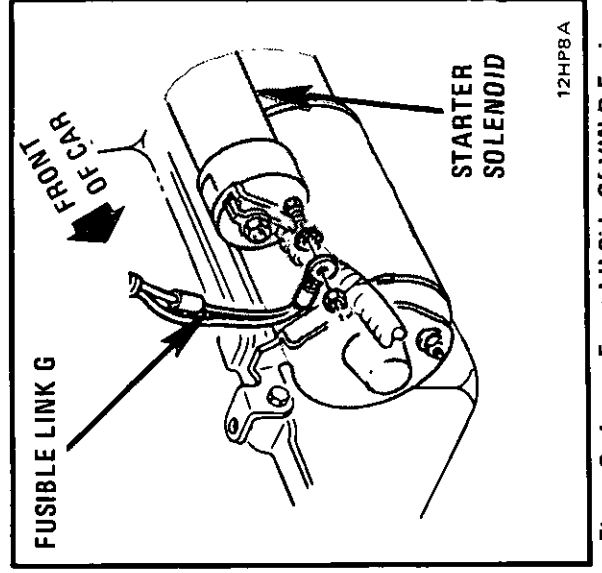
Figure C - Lower Front LH Side Of VIN R Engine (VIN 9 Similar)
